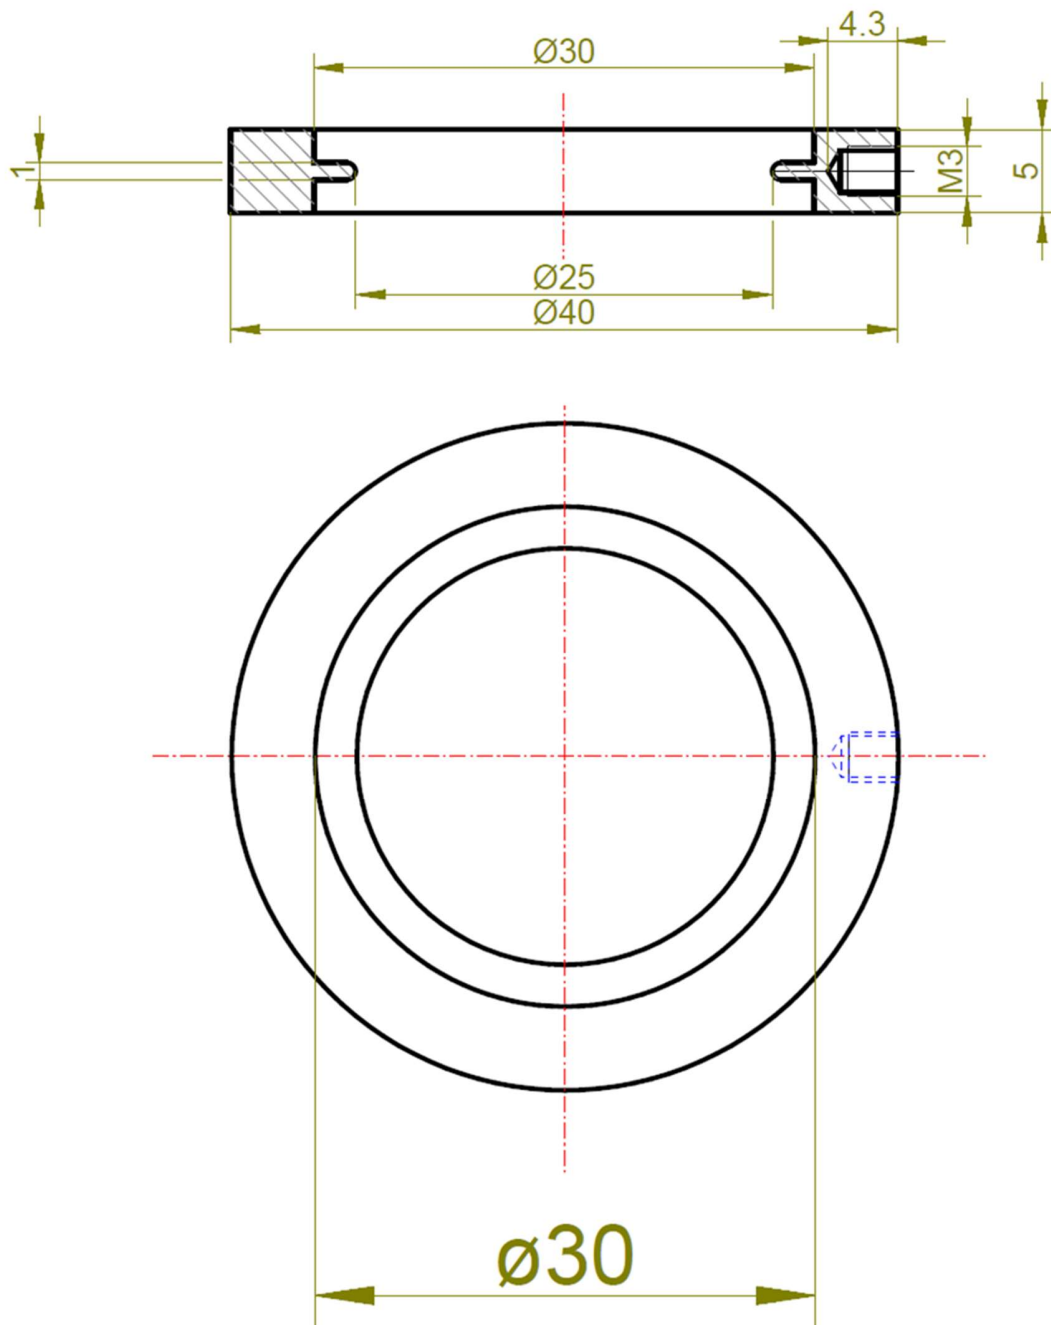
Drift ring electrode with an inner thickness of 1 mm and the outer thickness of 5 mm. The M3 thread is for the mechanical integration of voltage terminals. All dimensions in mm. Material: stainless steel
